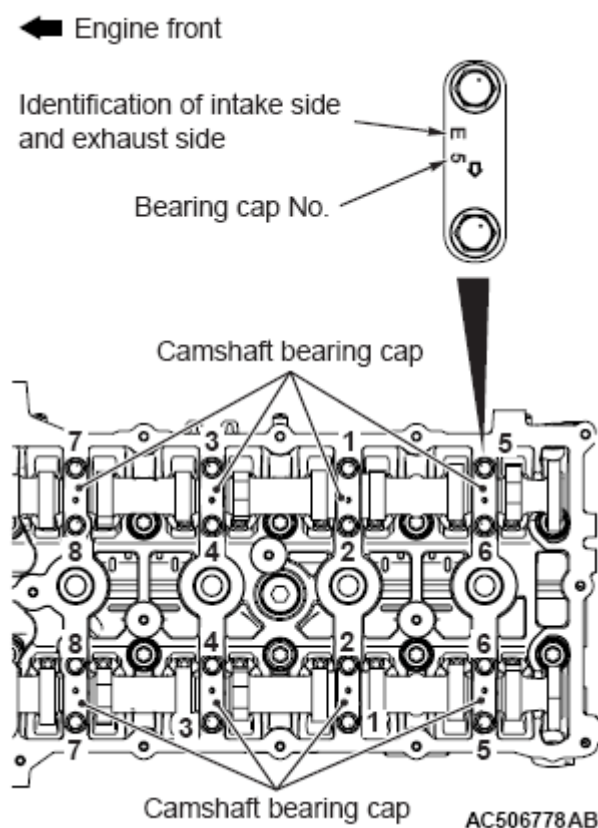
Identifying Tightening Sequence Of Camshaft Bearing Cap Bolts
